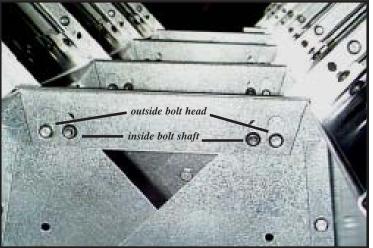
Plenum closure door angles loosely bolted through length of dryer. Note bolt orientation.
